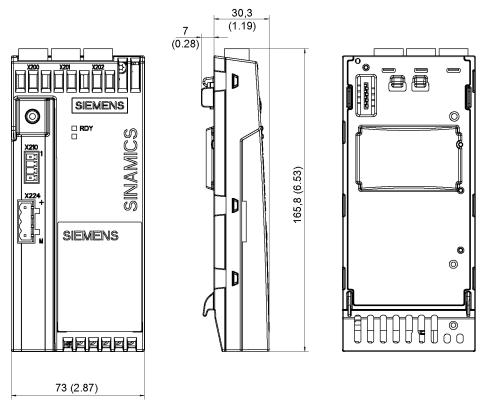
Dimension drawing of Control Unit Adapter CUA31, all data in mm and (inches)
